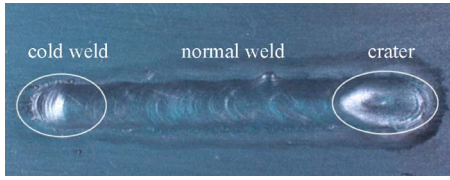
A typical weld bead of GMAW of aluminum alloys
